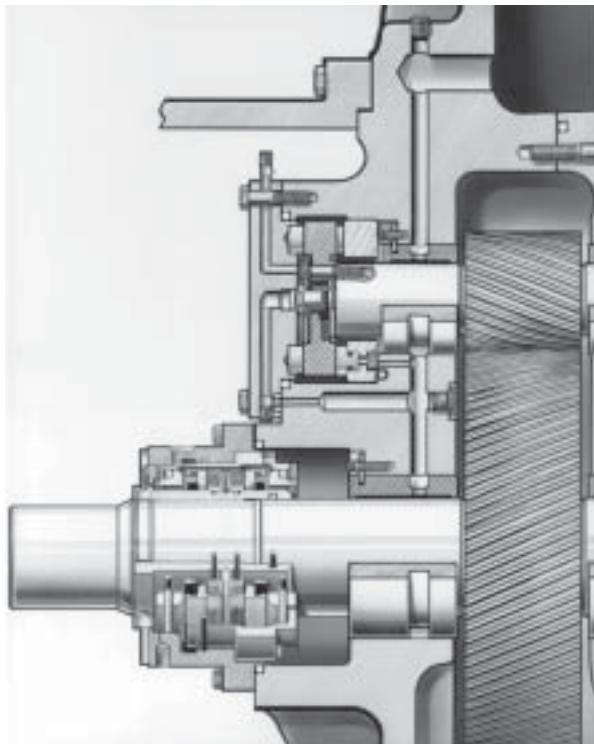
HIGH-SPEED REAR BEARING REMOVAL
